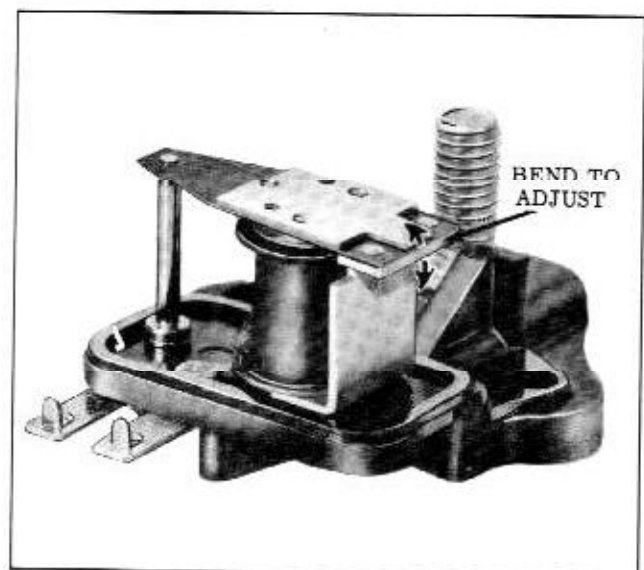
Adjusting Horn Relay Closing Voltage
